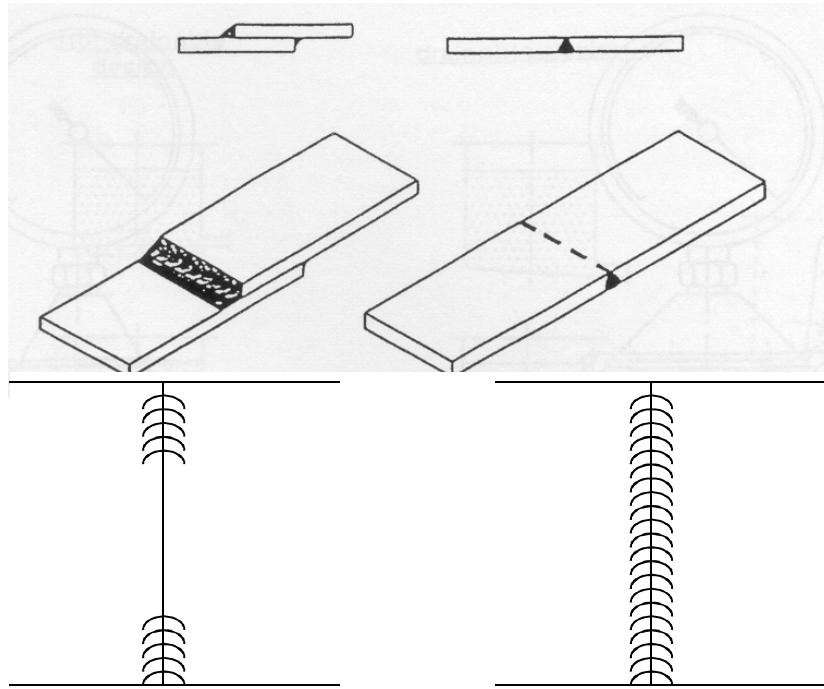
Less preferred (left) and preferred (right) ways of welding.
